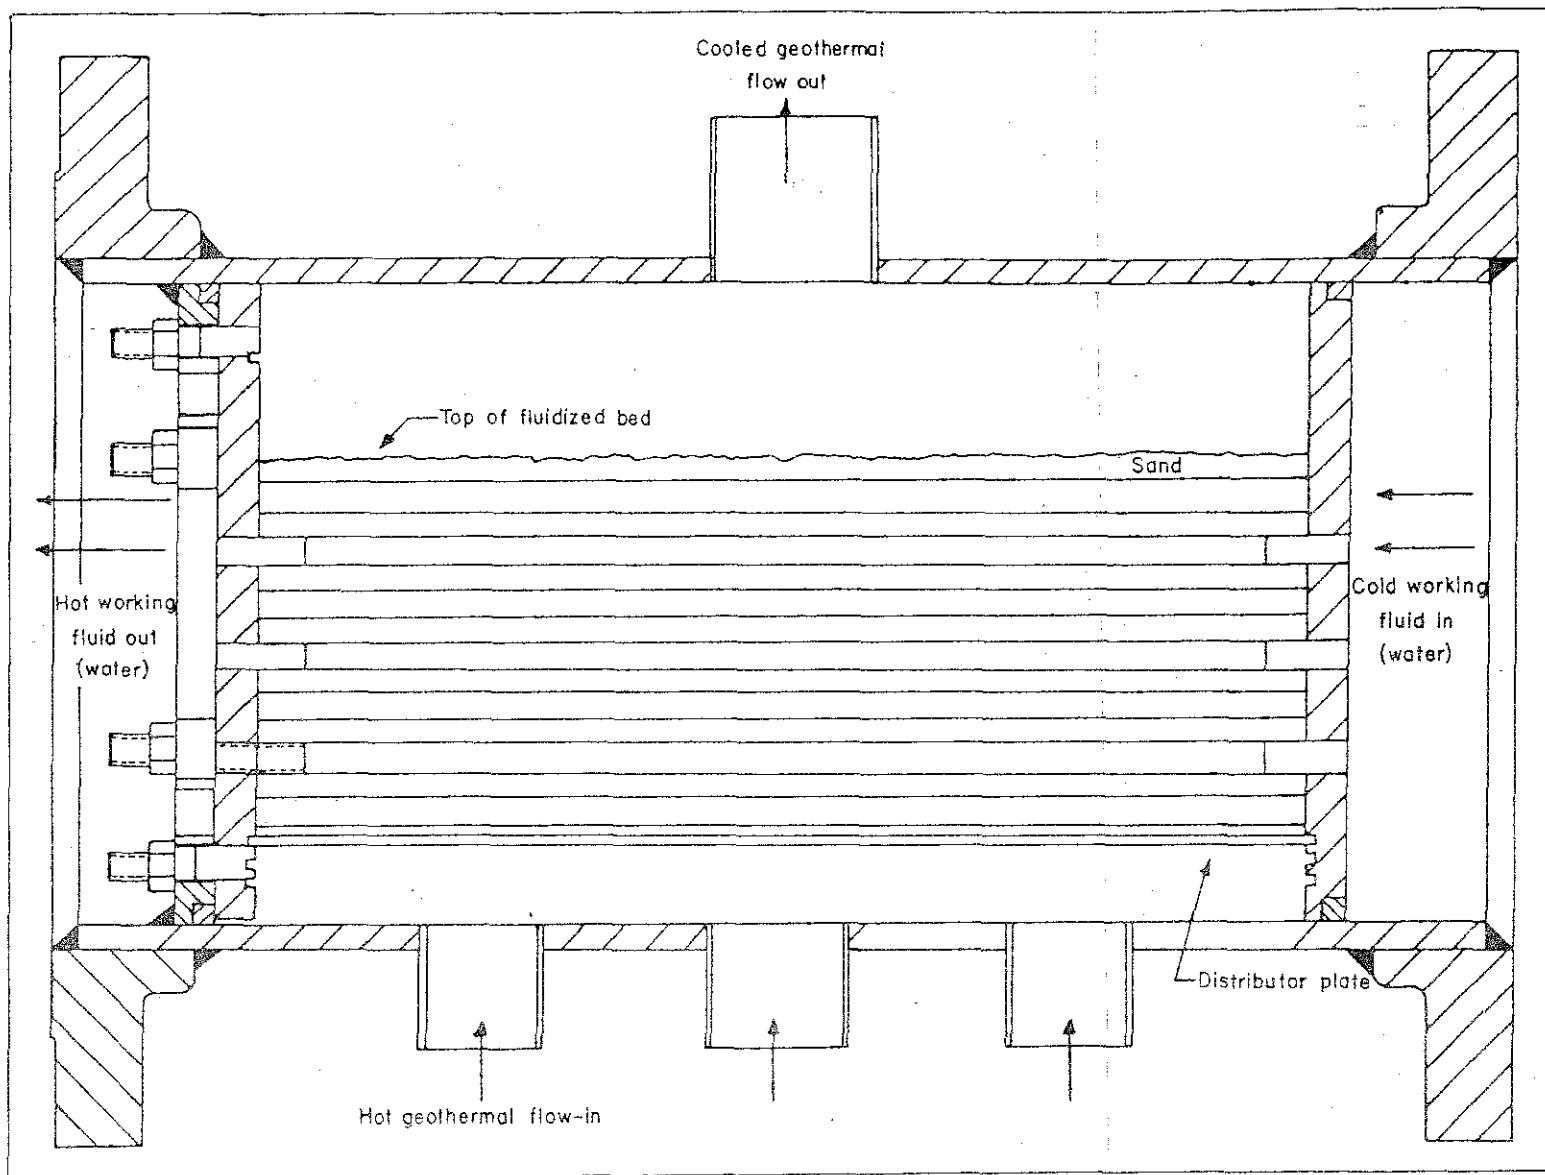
Horizontal arrangement of a liquid fluidized-bed heat exchanger.
